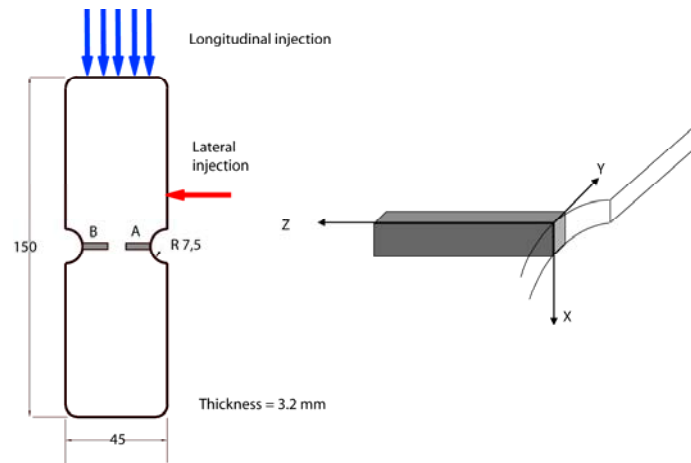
Specimen type and dimensions, with injection gates; shape and position of samples examined with micro-CT
